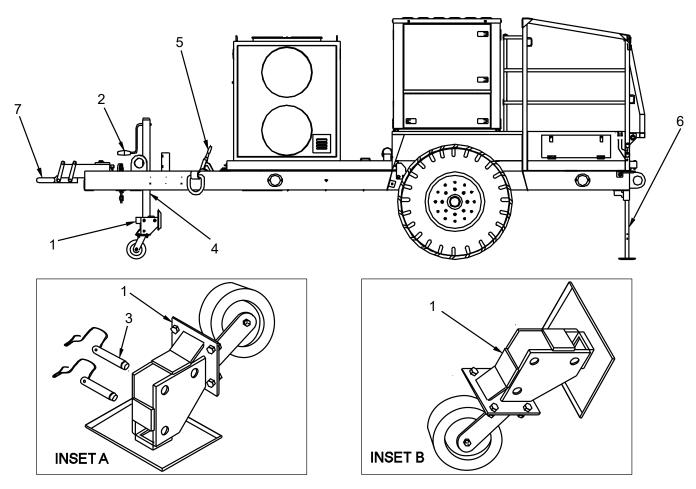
Wheel/Skid Plate Assembly Mounting Positions.
